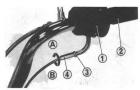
(1) Switch case (2) Throttle grip (3) Lock nut (4) Upper adjuster
